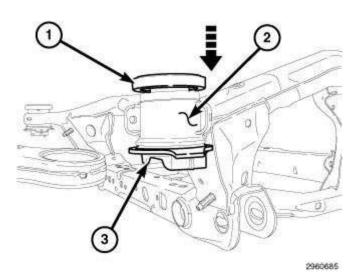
Spacer & Engine Cradle Crossmember Courtesy of CHRYSLER GROUP, LLC
